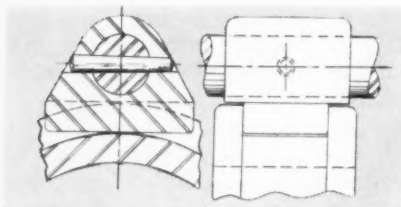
In many designs of shifting arrangements, it is not possible to first reach the center line with shoes or secondly have two shoes.
